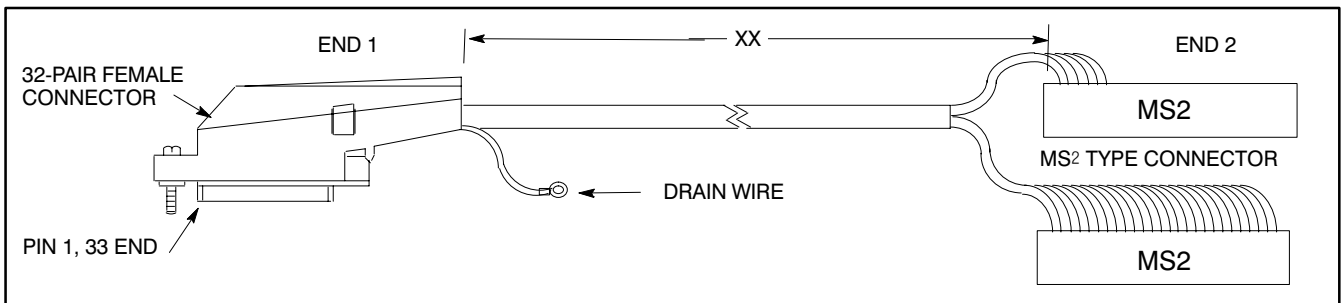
Shelf Connecting Cable Assembly with MS² Type Connector - 003-2976XX
